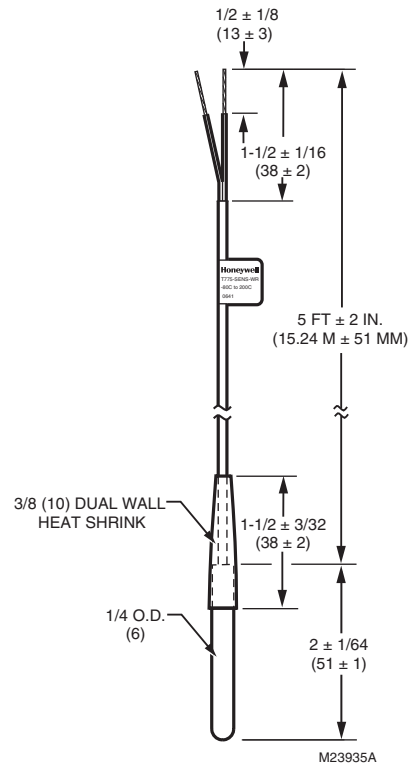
T775-SENS-WR Dimensions in Inches (mm).
